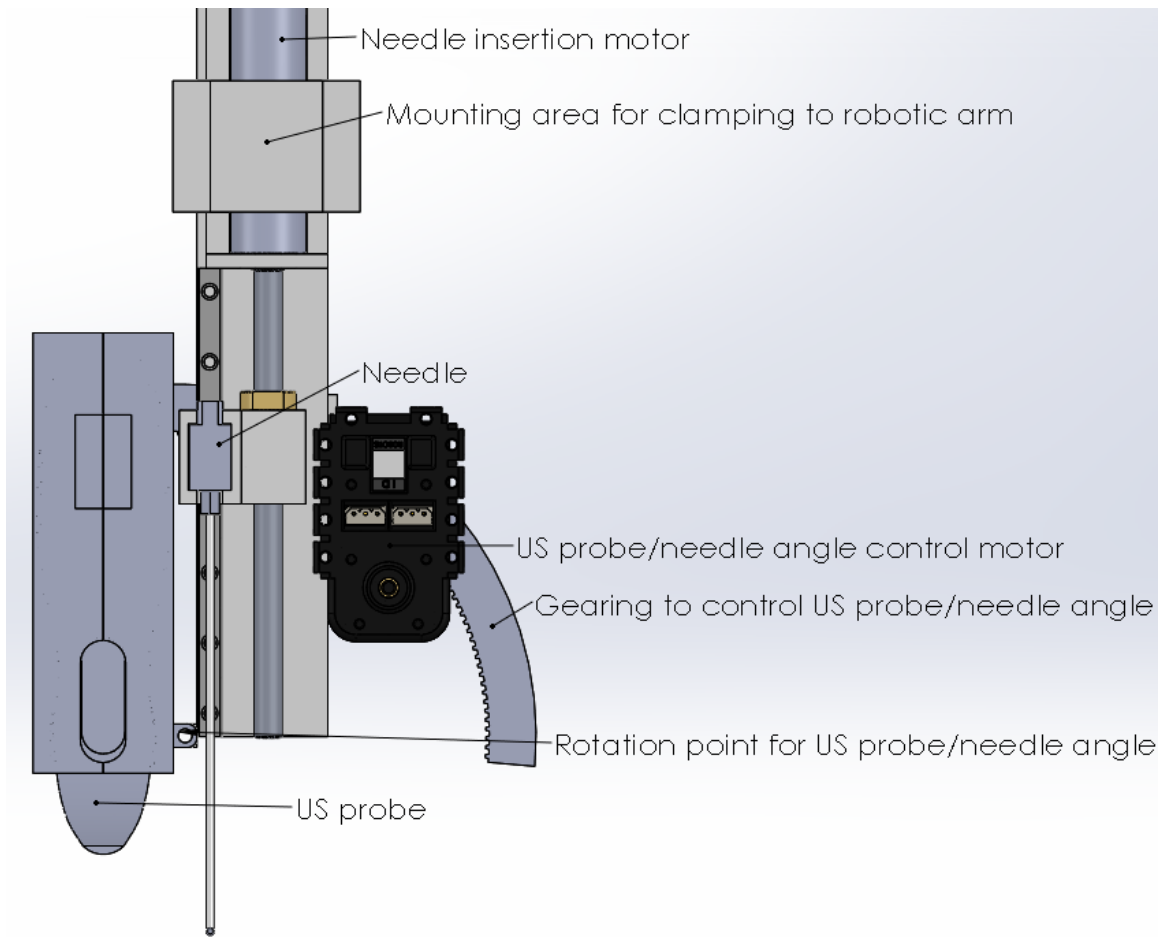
Initial design incorporating ultrasound probe and needle insertion mechanism
